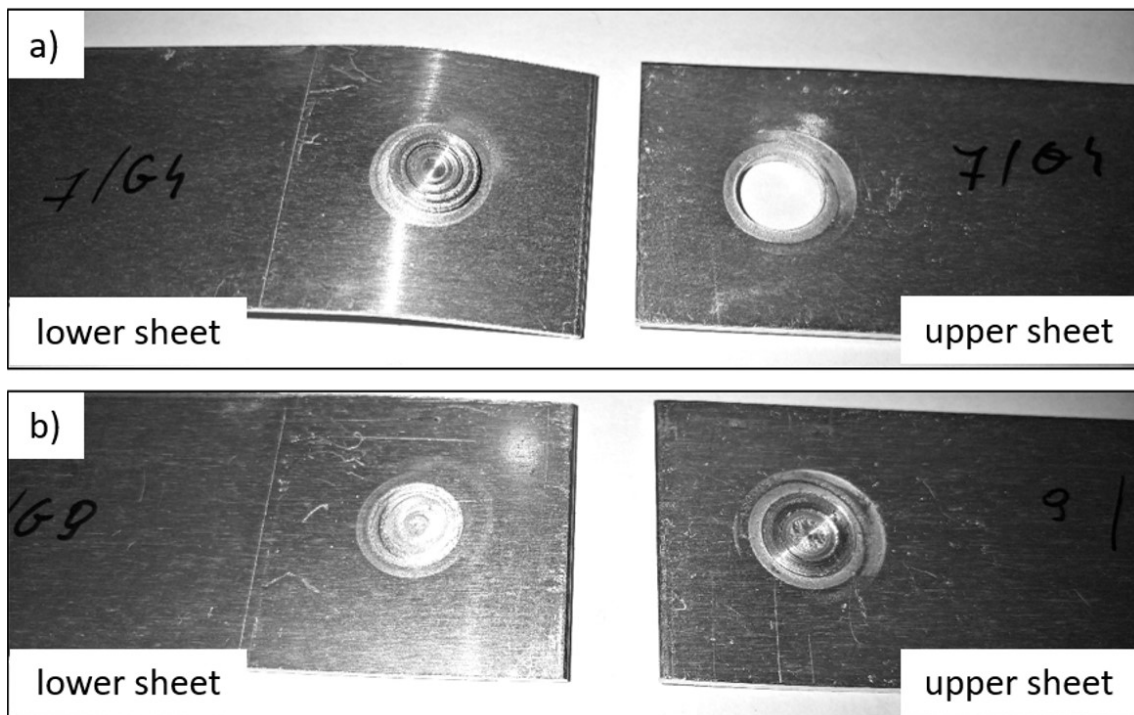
Basic types of failure of RFSSW welds in the uniaxial testing of samples, a) tearing the weld from the upper sheet, b) shear the weld
